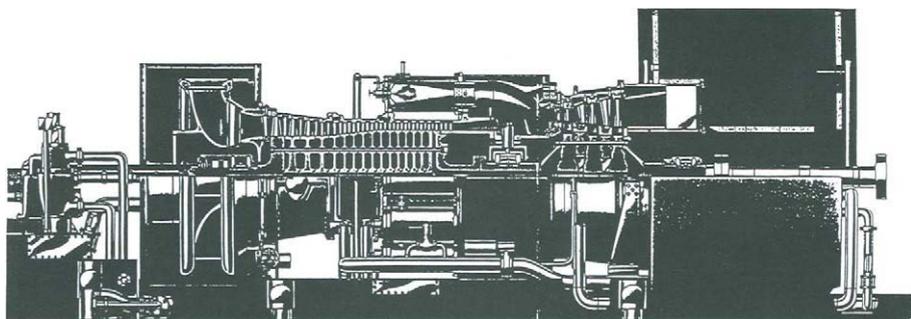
Single shaft industrial gas turbine (Courtesy of General Electric)
